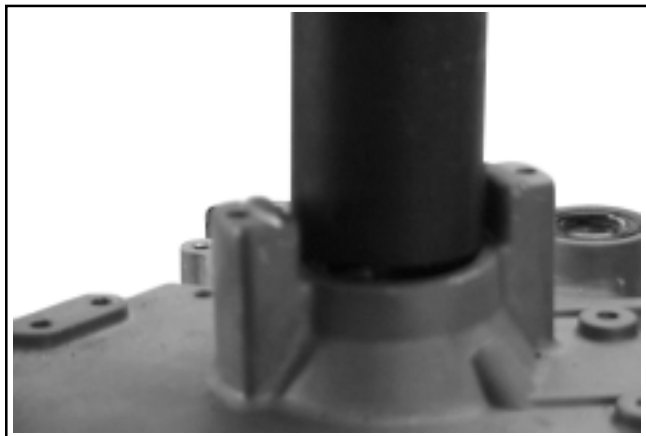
Installing Flywheel End Oil Seal in Crankcase.
